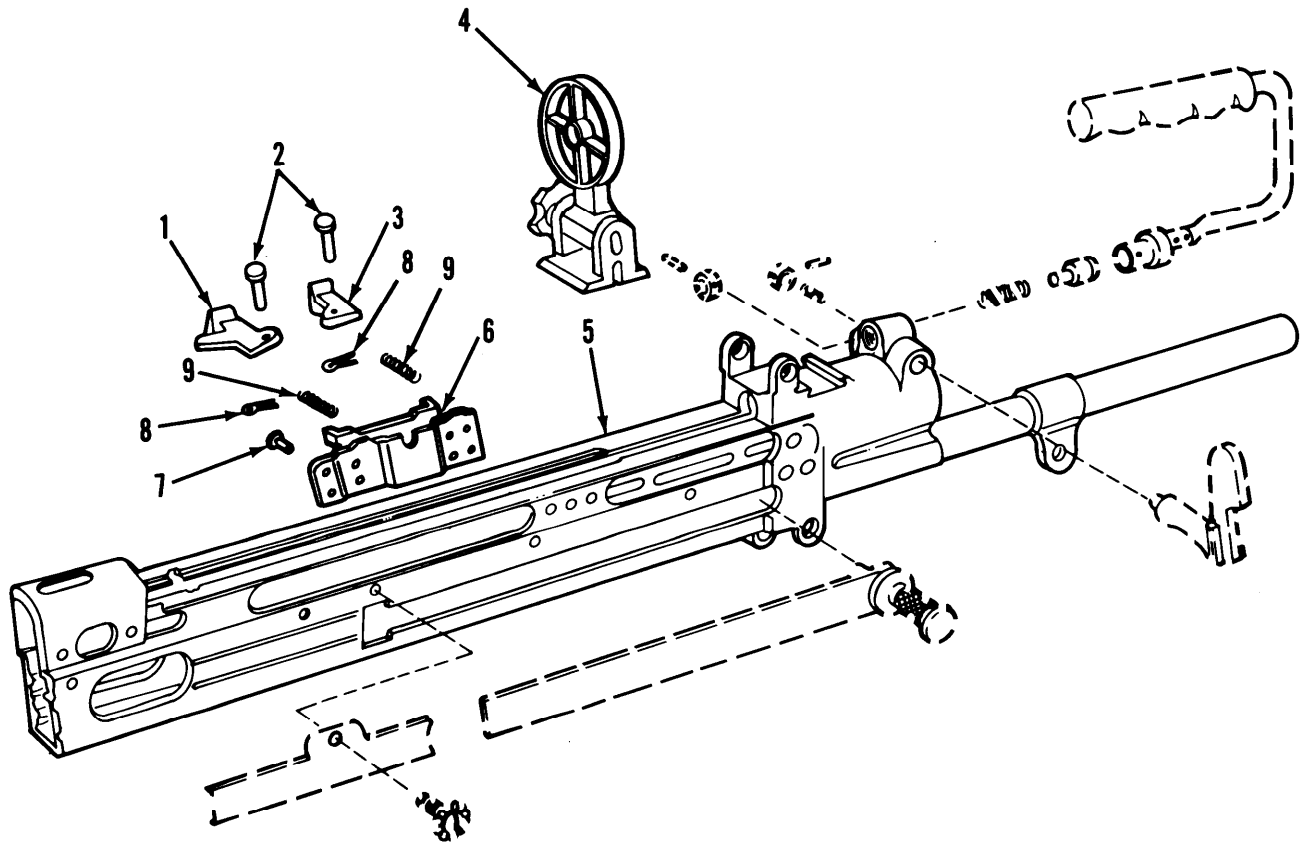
Machine gun, 7.62-mm M60 and M60D (M60D major assemblies).
